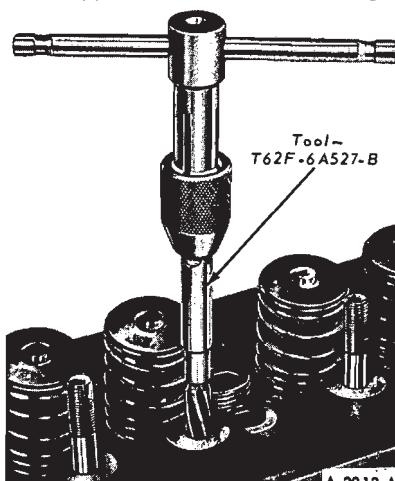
Reaming Rocker Arm Stud Bore—240 Six, 302-W and 351 V-8
